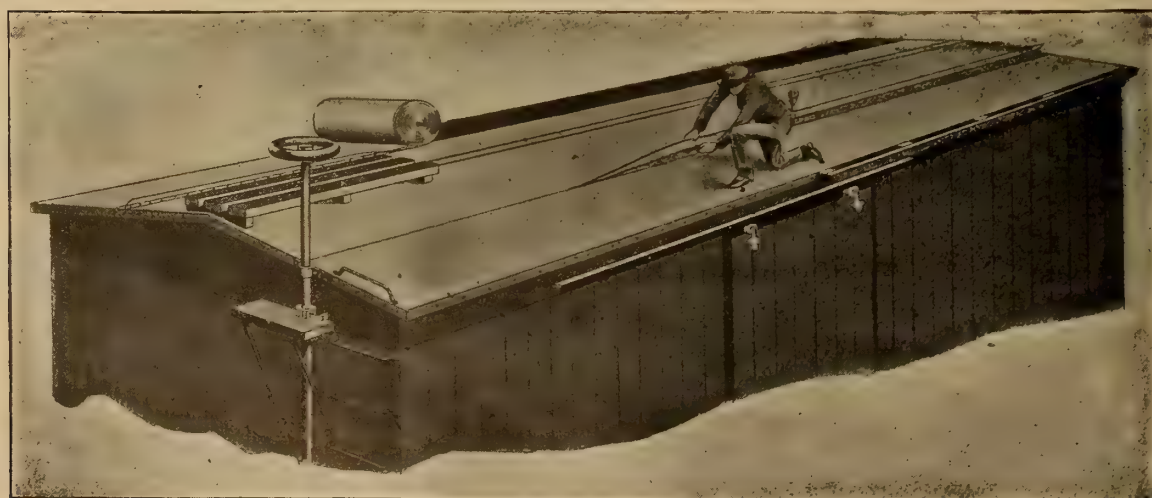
APPLICATION OF CAREY'S PLASTIC ROOFING.
